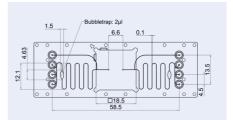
Detailed schematic drawing of basic sensor platform II - Fluidic 1005
